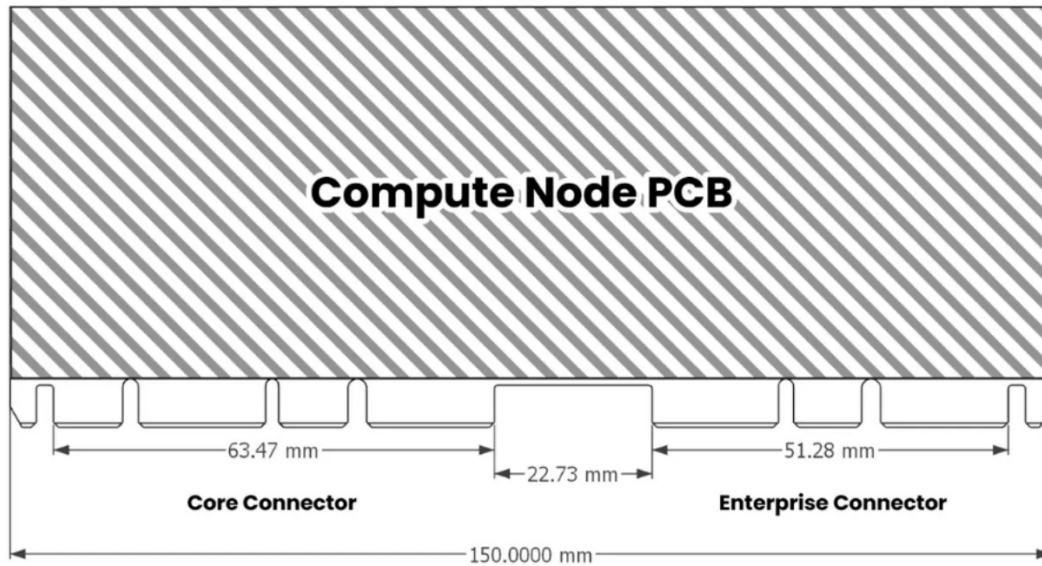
Core and Enterprise Connector Plug Layout on PCB
